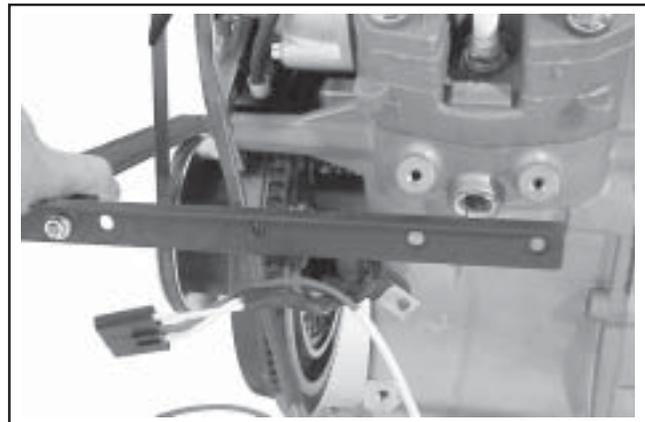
Removing LH and RH Mounting Brackets/Screws.
